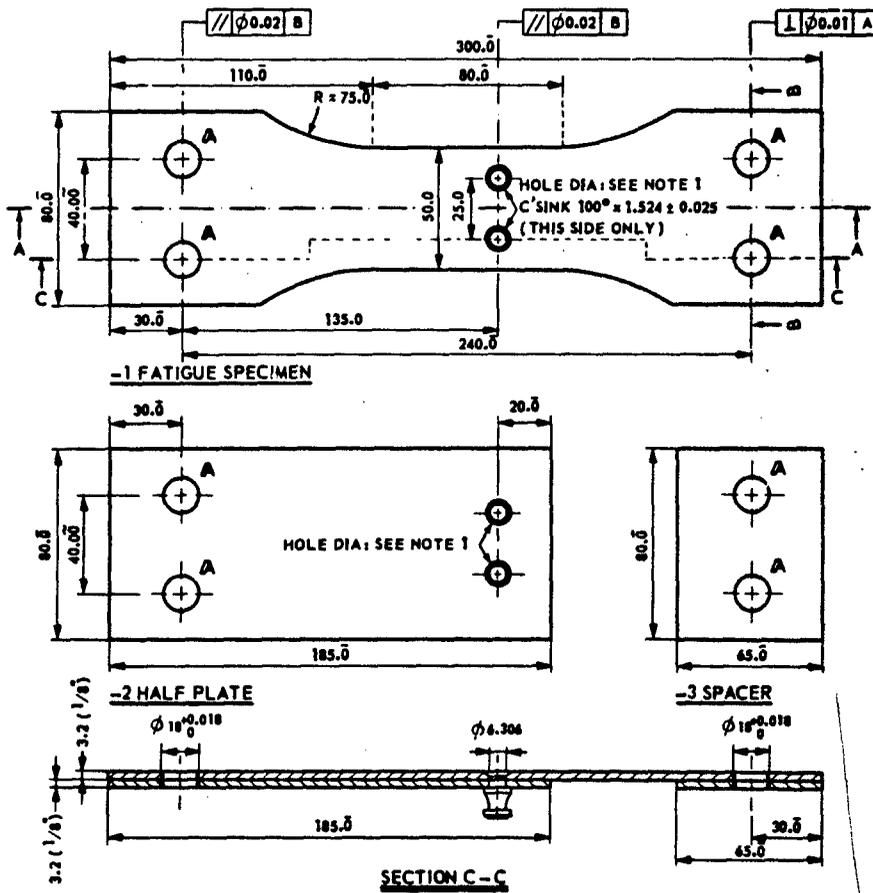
The CFCTP core programme and recommended supplemental testing specimen. All dimensions are in millimetres.
